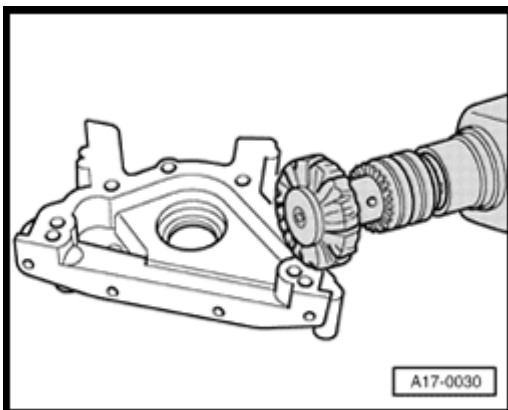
Removing Sealant Remains On Sealing Flange With A Rotating Plastic Brush
